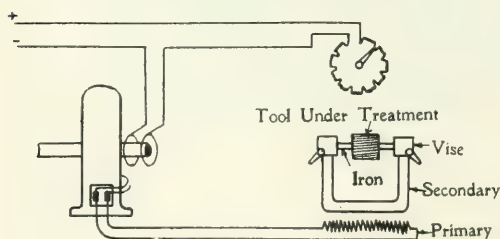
METHOD USED IN THE ELECTRIC ANNEALING OF MILLING AND GEAR CUTTERS, ETC.
